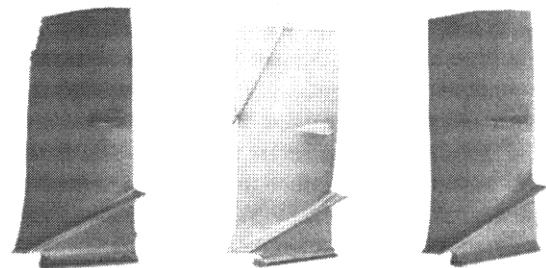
Repair of FODed F404 fan blade by electron beam welding a corner patch to replace damaged portion of blade.
